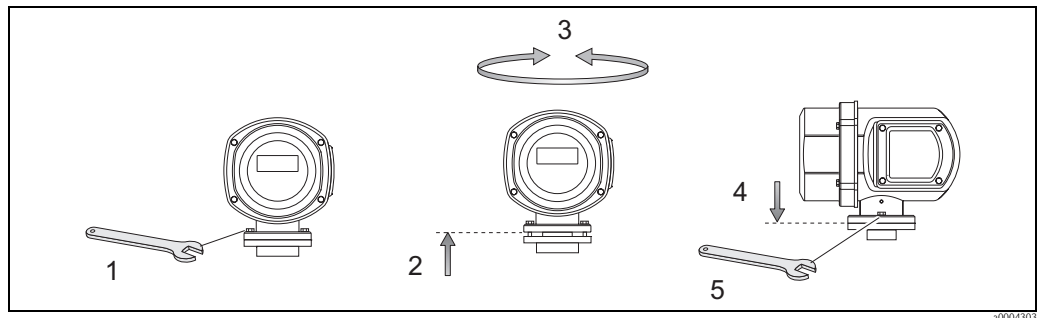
Turning the transmitter housing (stainless-steel field housing)
